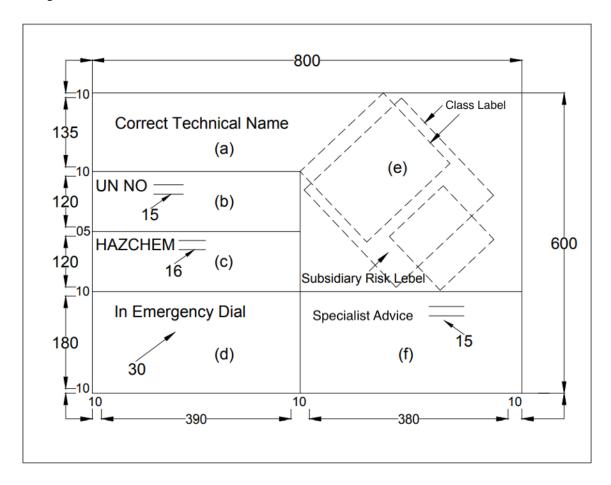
PANEL DIMENSIONS (All dimensions in mm)
